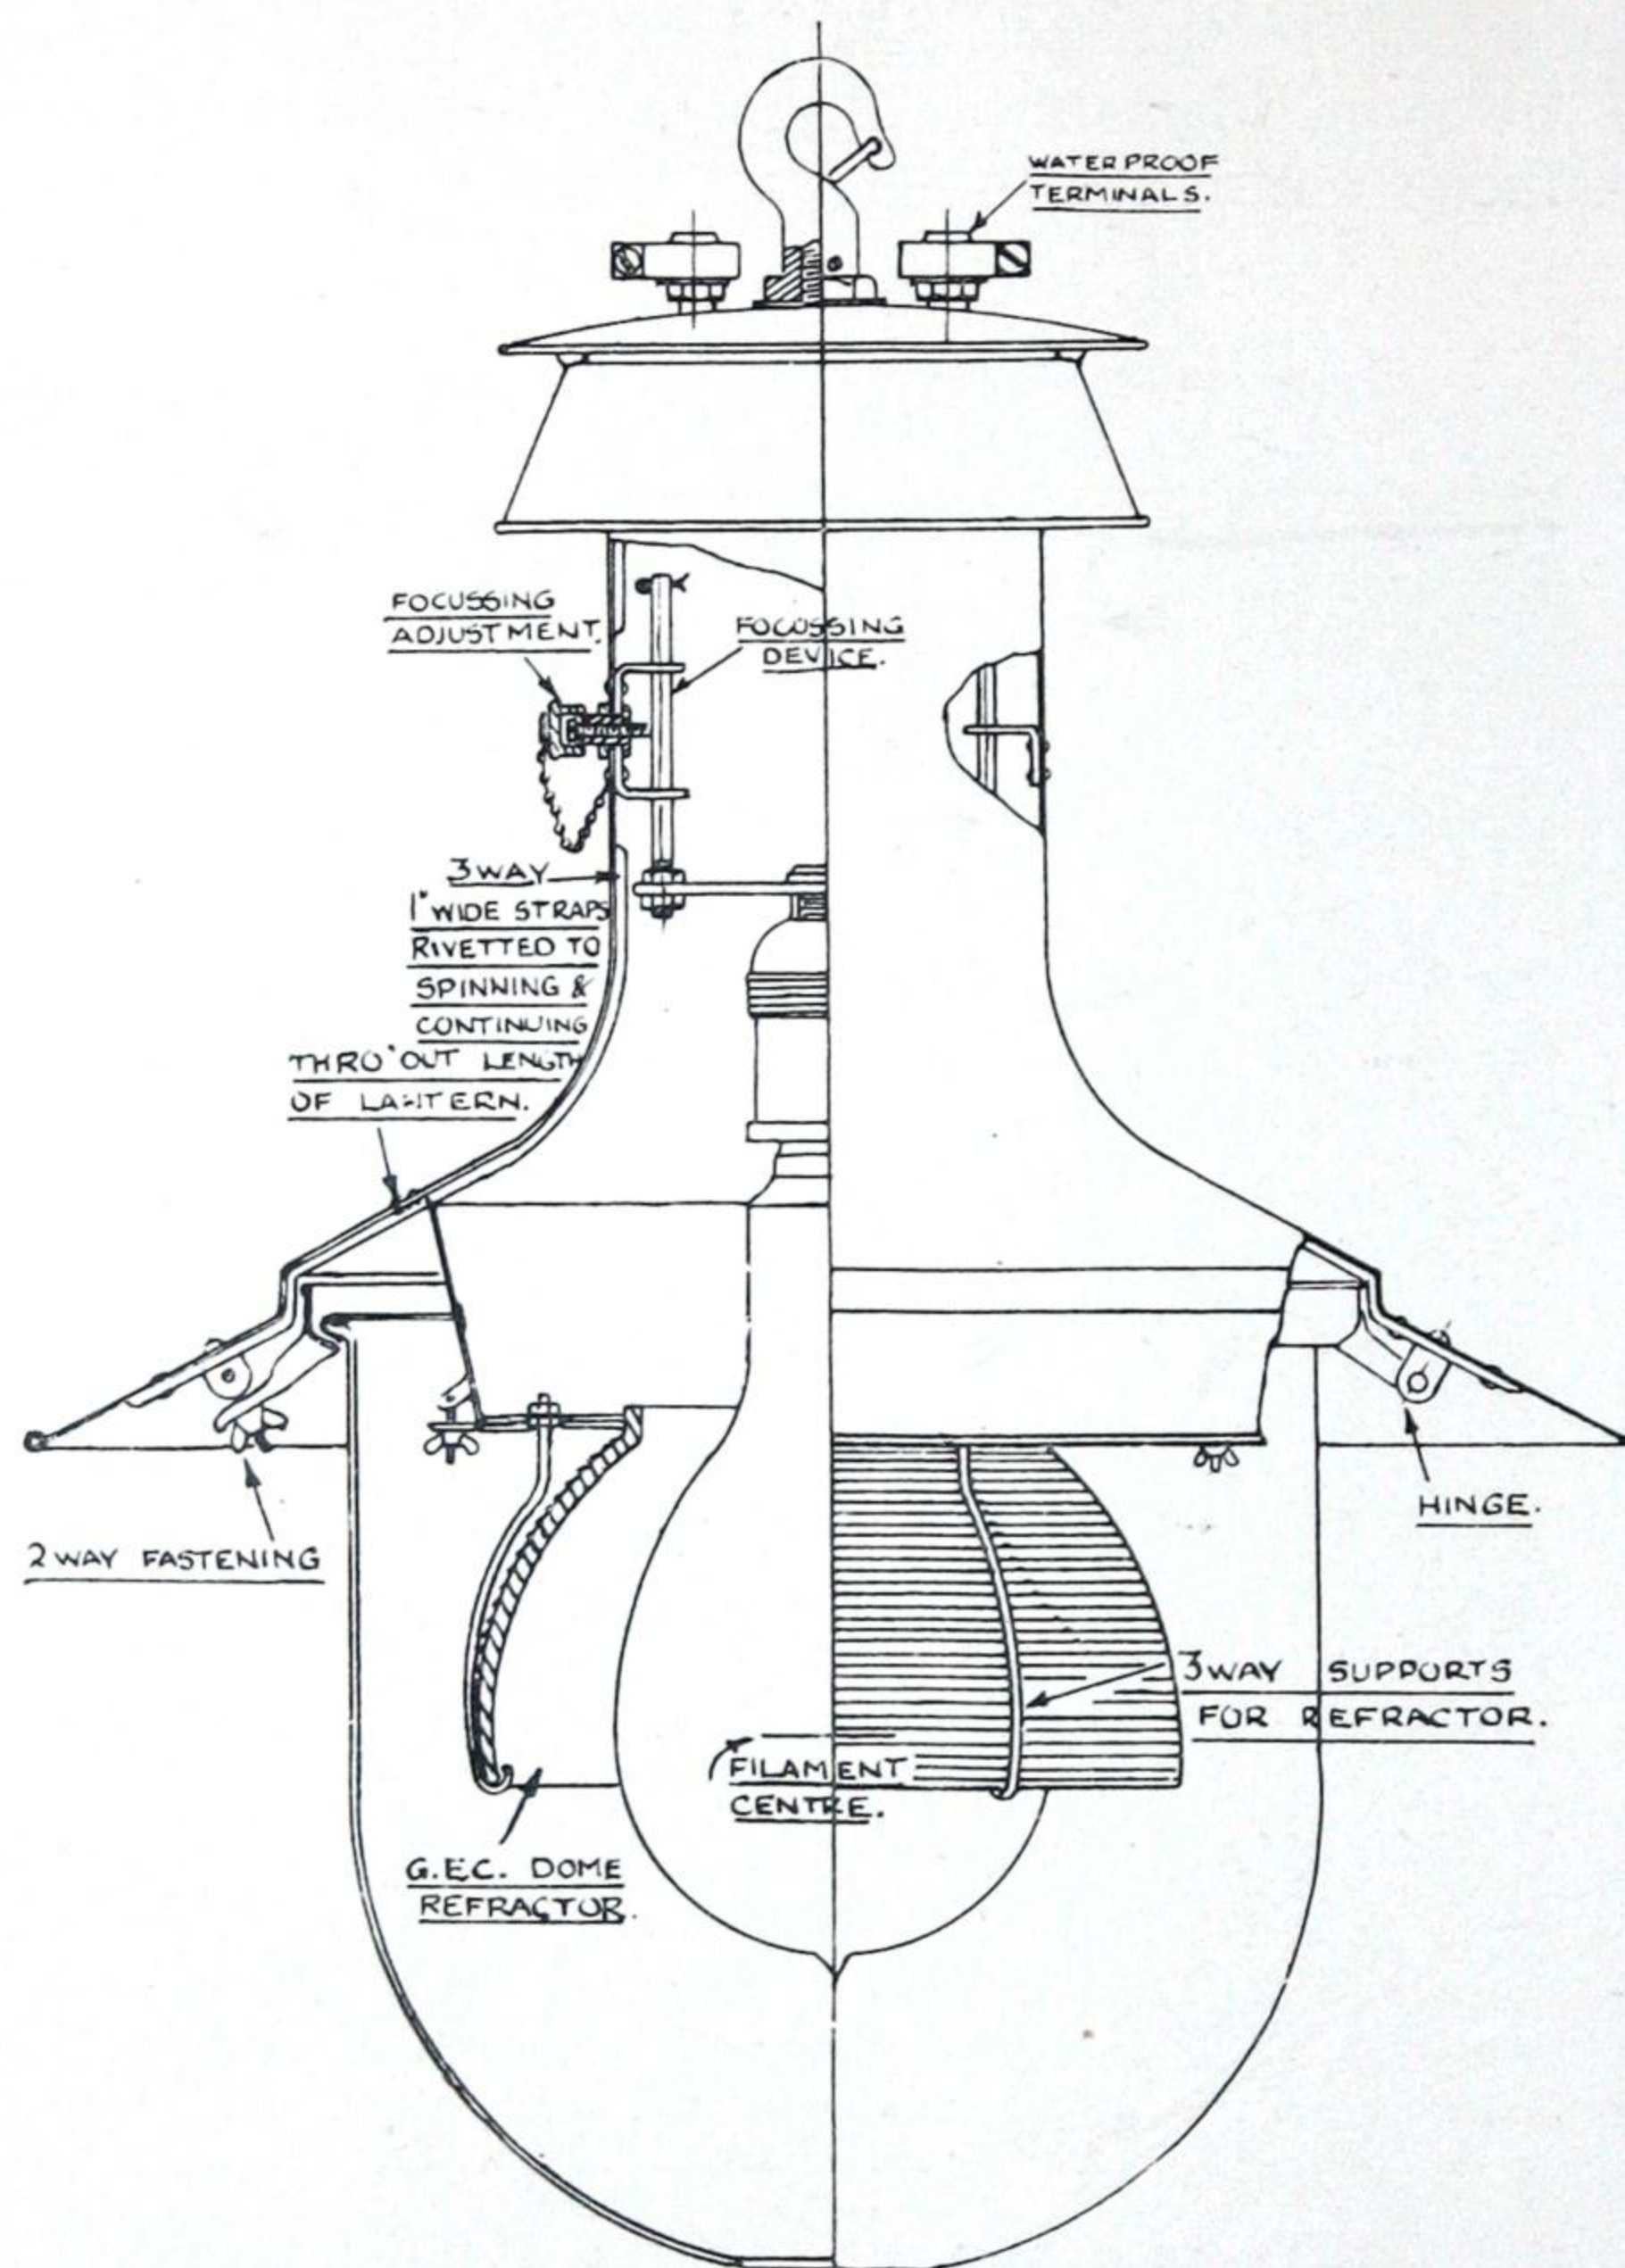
SECTIONAL ELEVATION OF "WEMBLEY" LANTERN.
